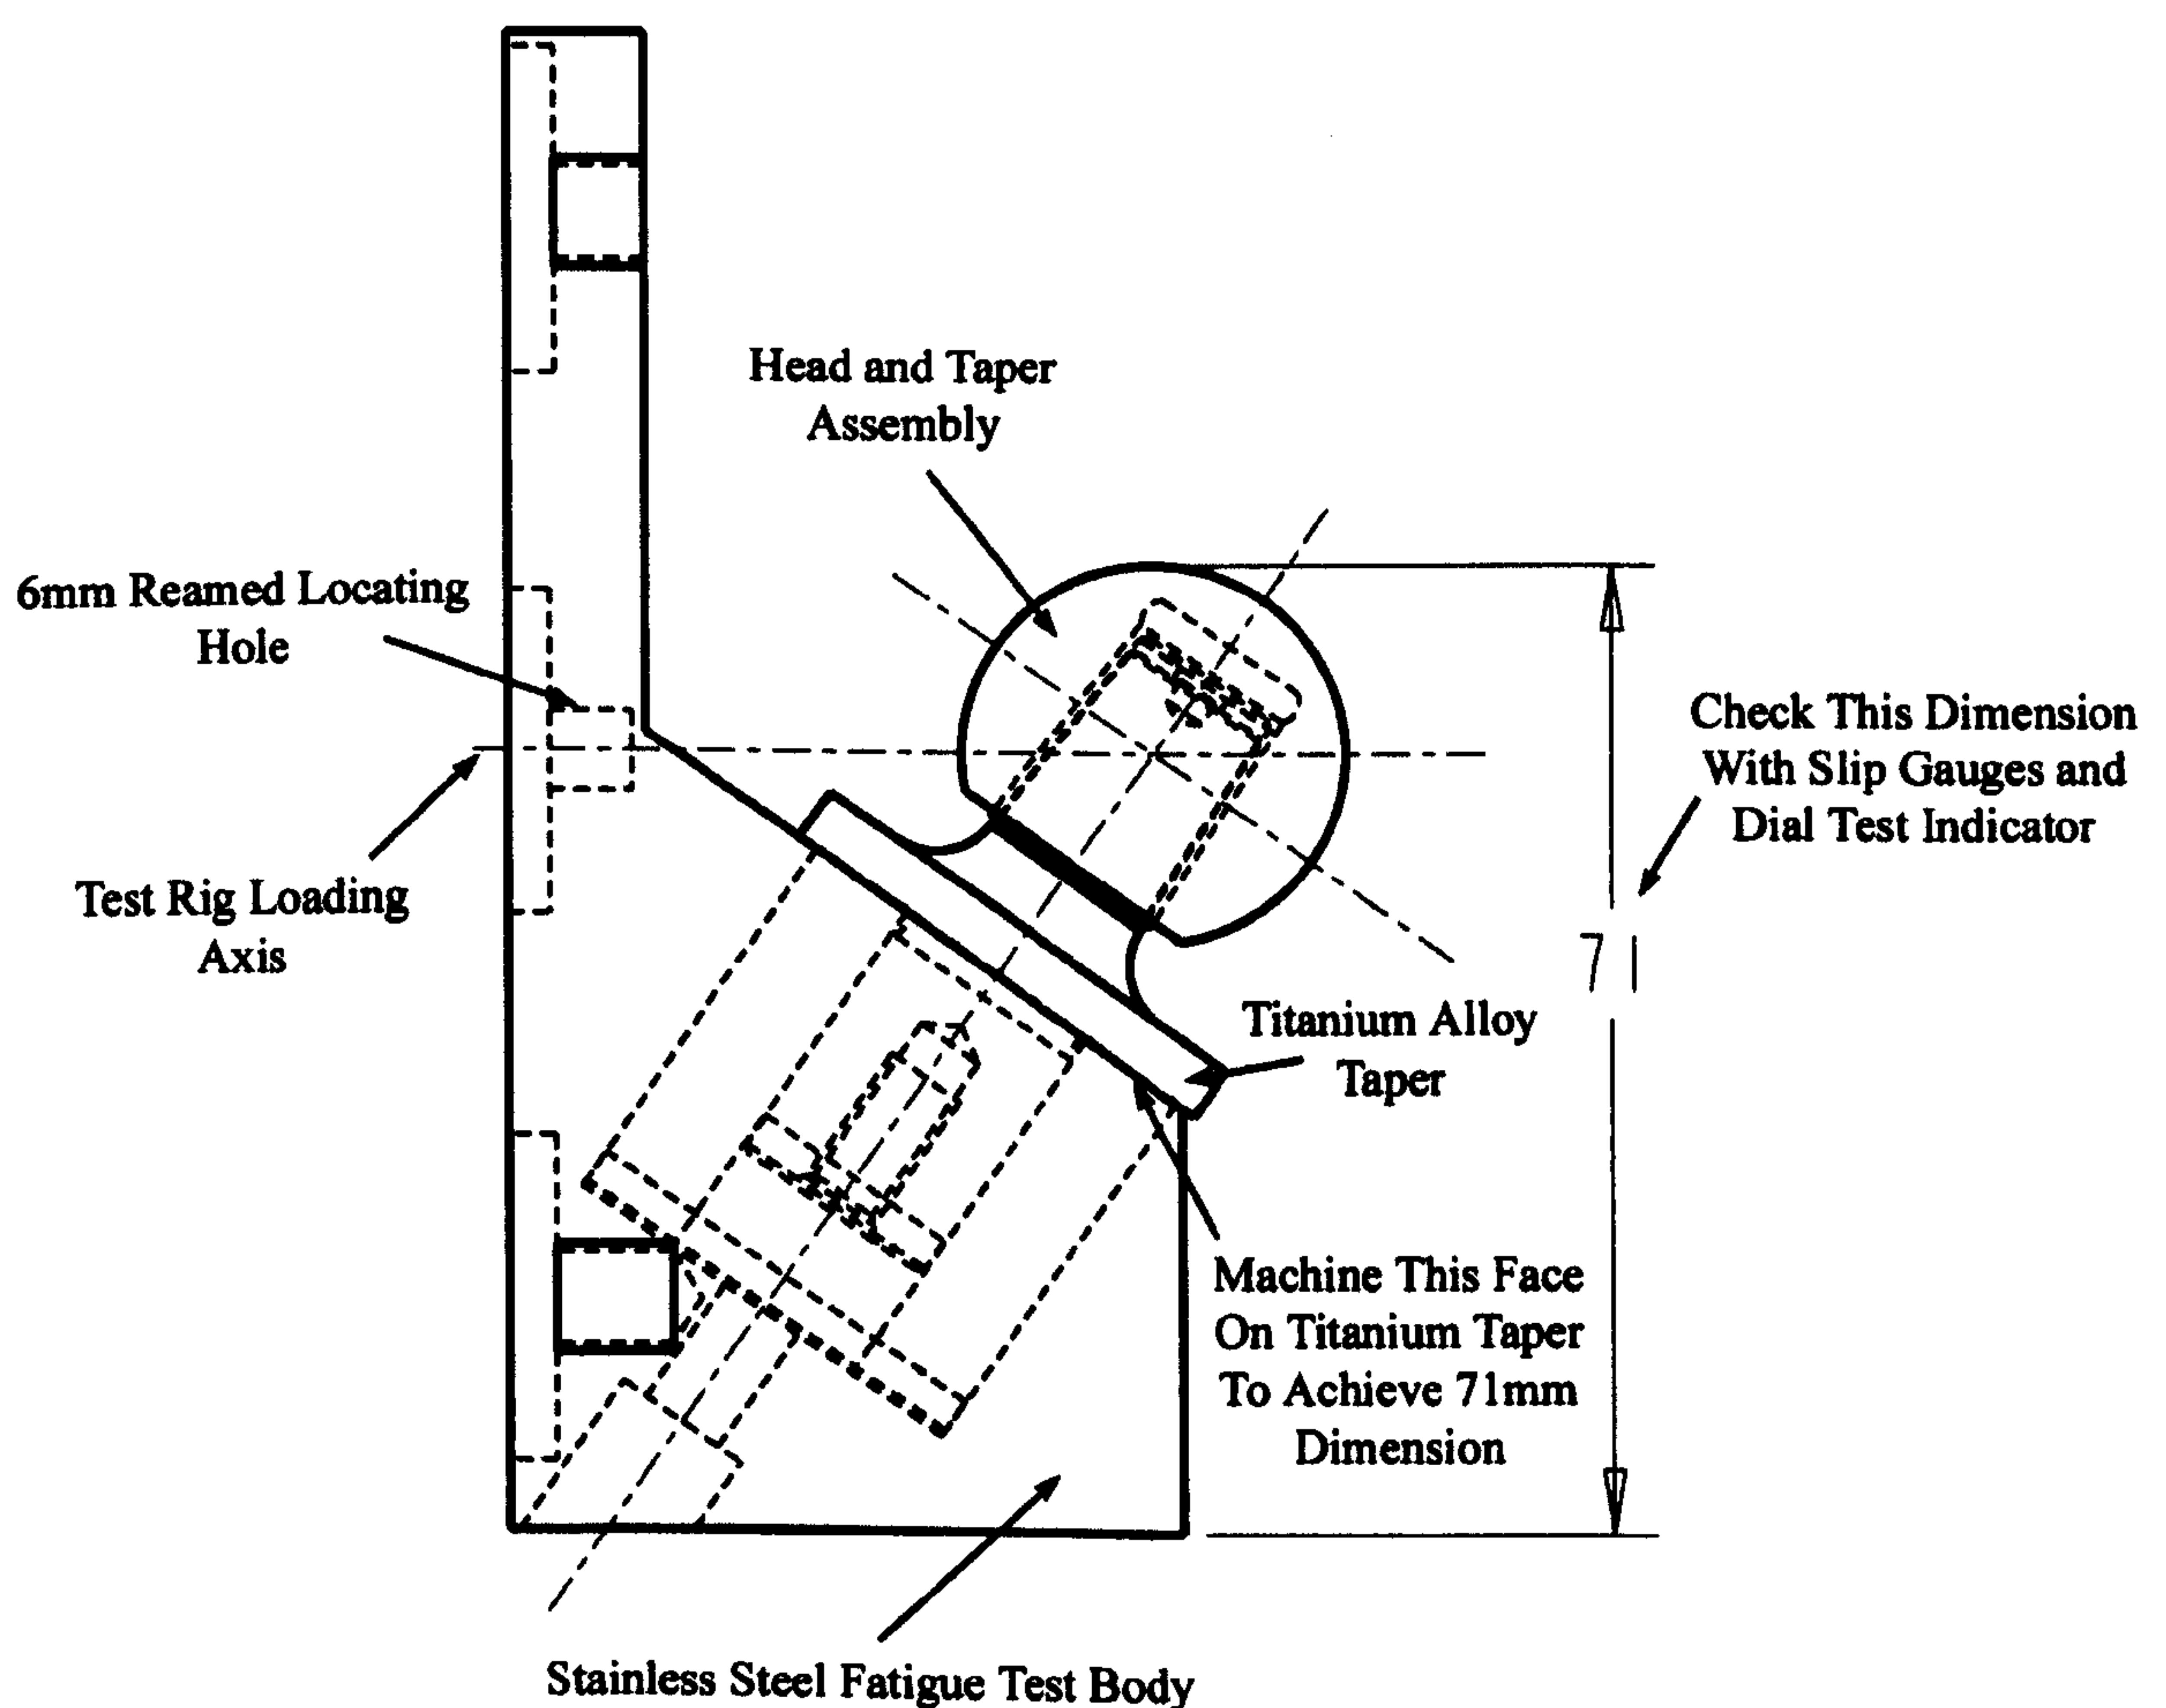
Engineering drawing for final fitting of taper/head assembly
